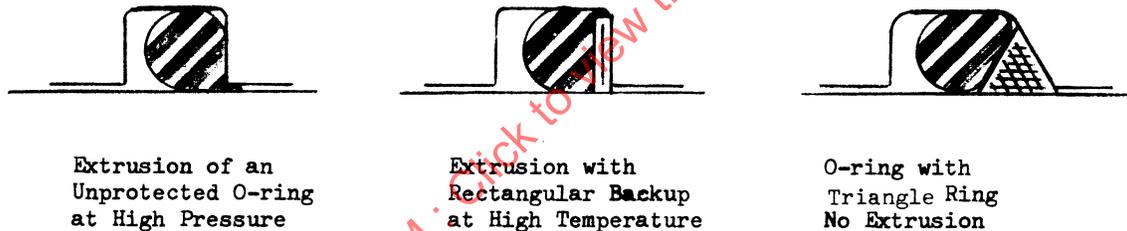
EXAMPLES OF O-RING EXTRUSION
